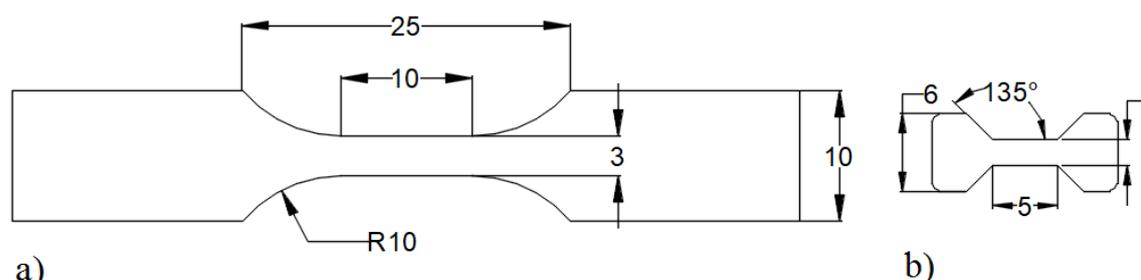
Geometry size for samples of type "Sample I" a) and type "Sample II" b).
